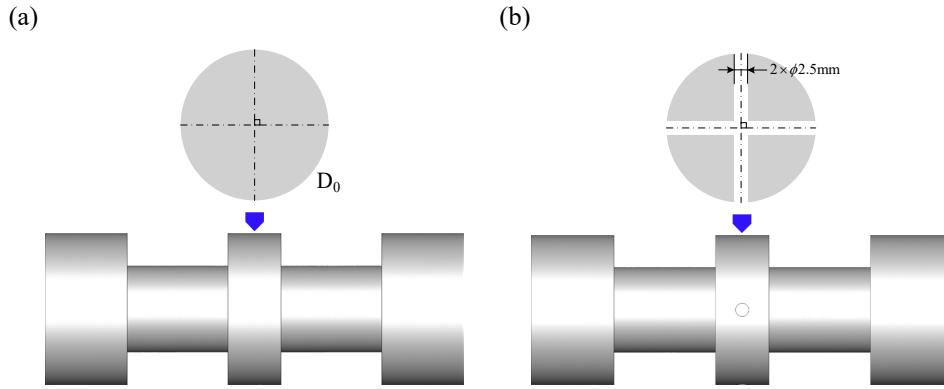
Original and optimized valve spool: (a) Original valve spool D_0 ; (b) Optimized valve spool D_1 with two perpendicular $\phi 2.5\text{mm}$ through-holes.
